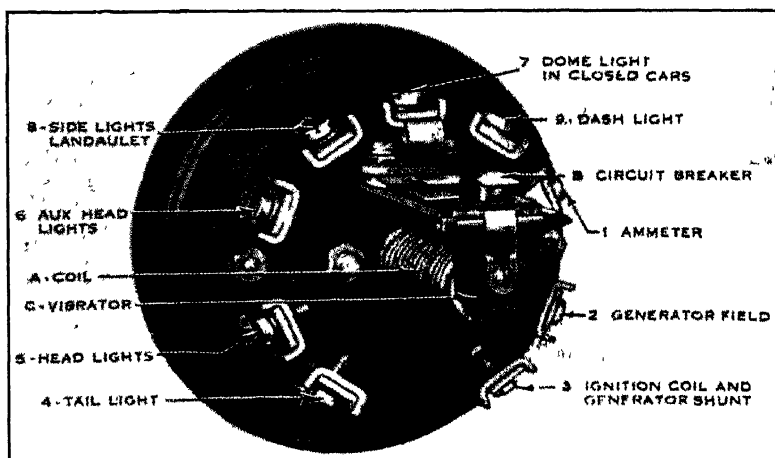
Rear view of Delco lighting switch showing installation of protective circuit breaker.
